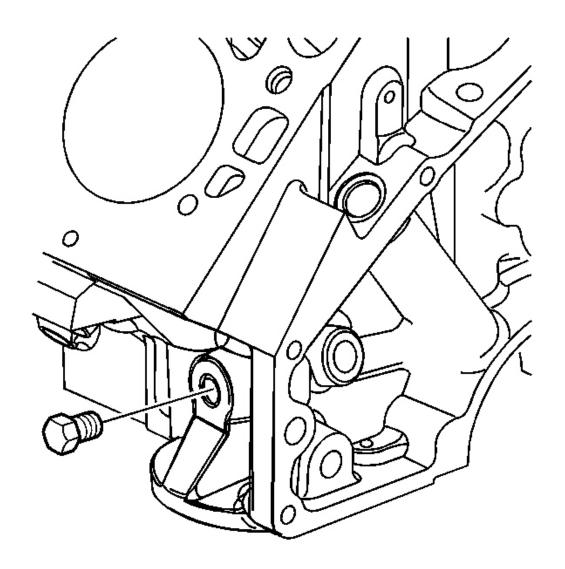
View Of Engine Block Left Oil Gallery Plug Courtesy of GENERAL MOTORS CORP.
